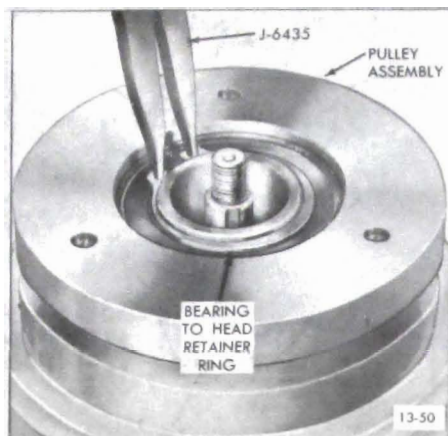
Removing or Installing Bearing to Head Retainer Ring
